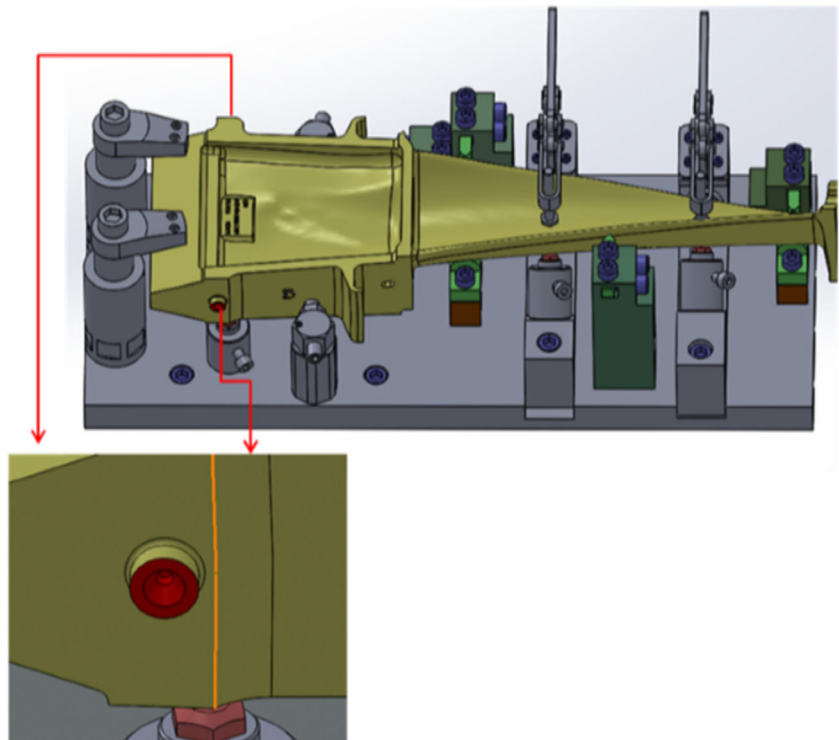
Machining device for drilling cooling holes at the airfoil of the blade by ECD
